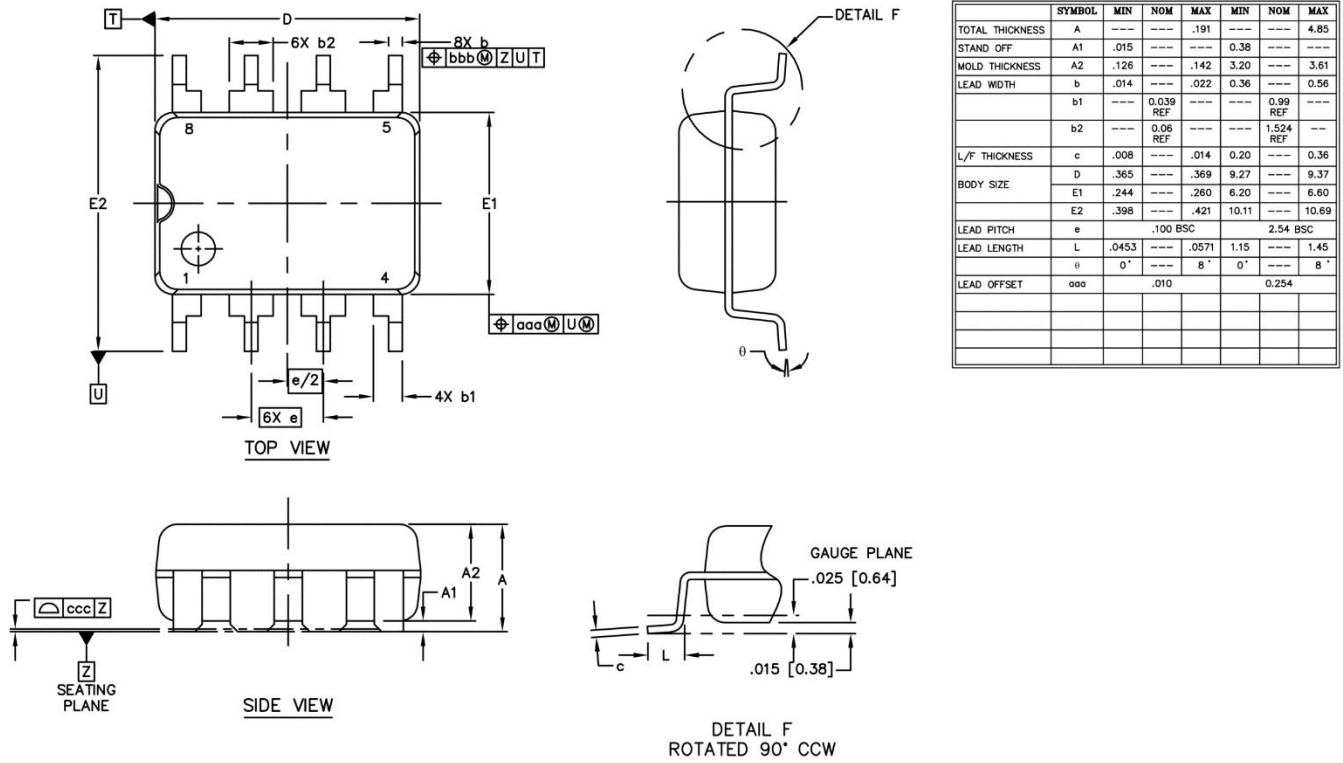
DUB8 Package Shape and Dimension in millimeters
